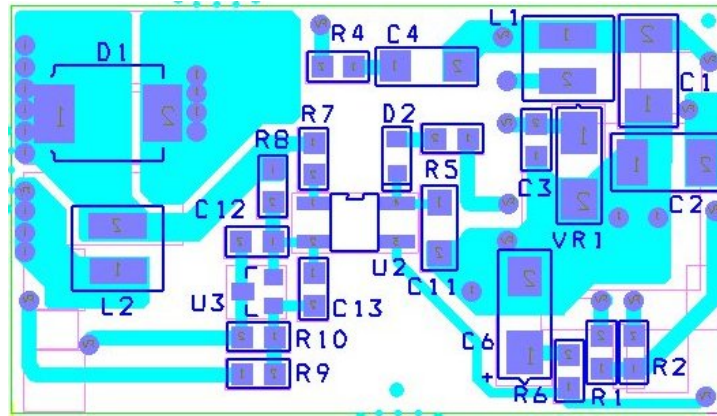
Bottom Side, SMT Printed Circuit Layout (Top View).
